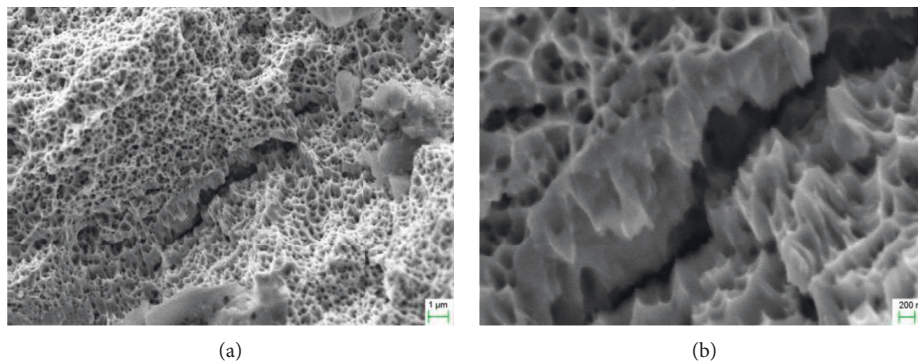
Fracture morphology. (a) Dimple morphology. (b) Crack.
